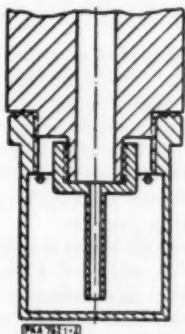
Cylindrical container with threaded holes near top edge and attached riser.
